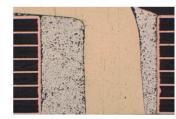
SnPb Solder, ENIG Surface Finish with Au/Ni Pin Finish, 0.02% Ni Contamination, Did Not Fail
